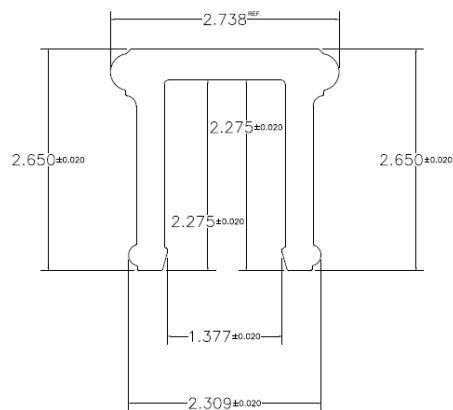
Liberty Common Rail Top Subrail and Bottom Rail
